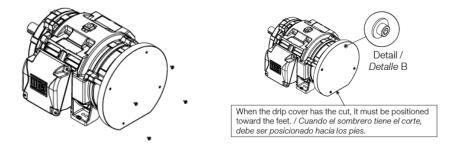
Paper-based technical drawing, presenting the assembly of the motor
